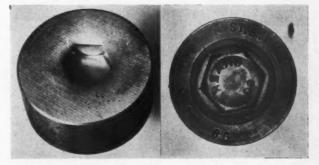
Cold hobbed inserts of molybdenum 2365 steel for heading hexagon bolts. The insert on the right, with lettering in the impression, is shown in the condition in which it was removed from the machine
